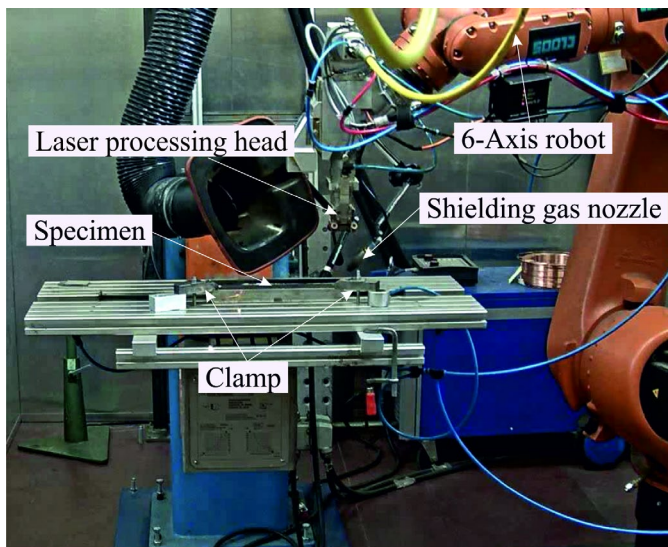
Experimental setup for the laser welding of the double-sided joints
